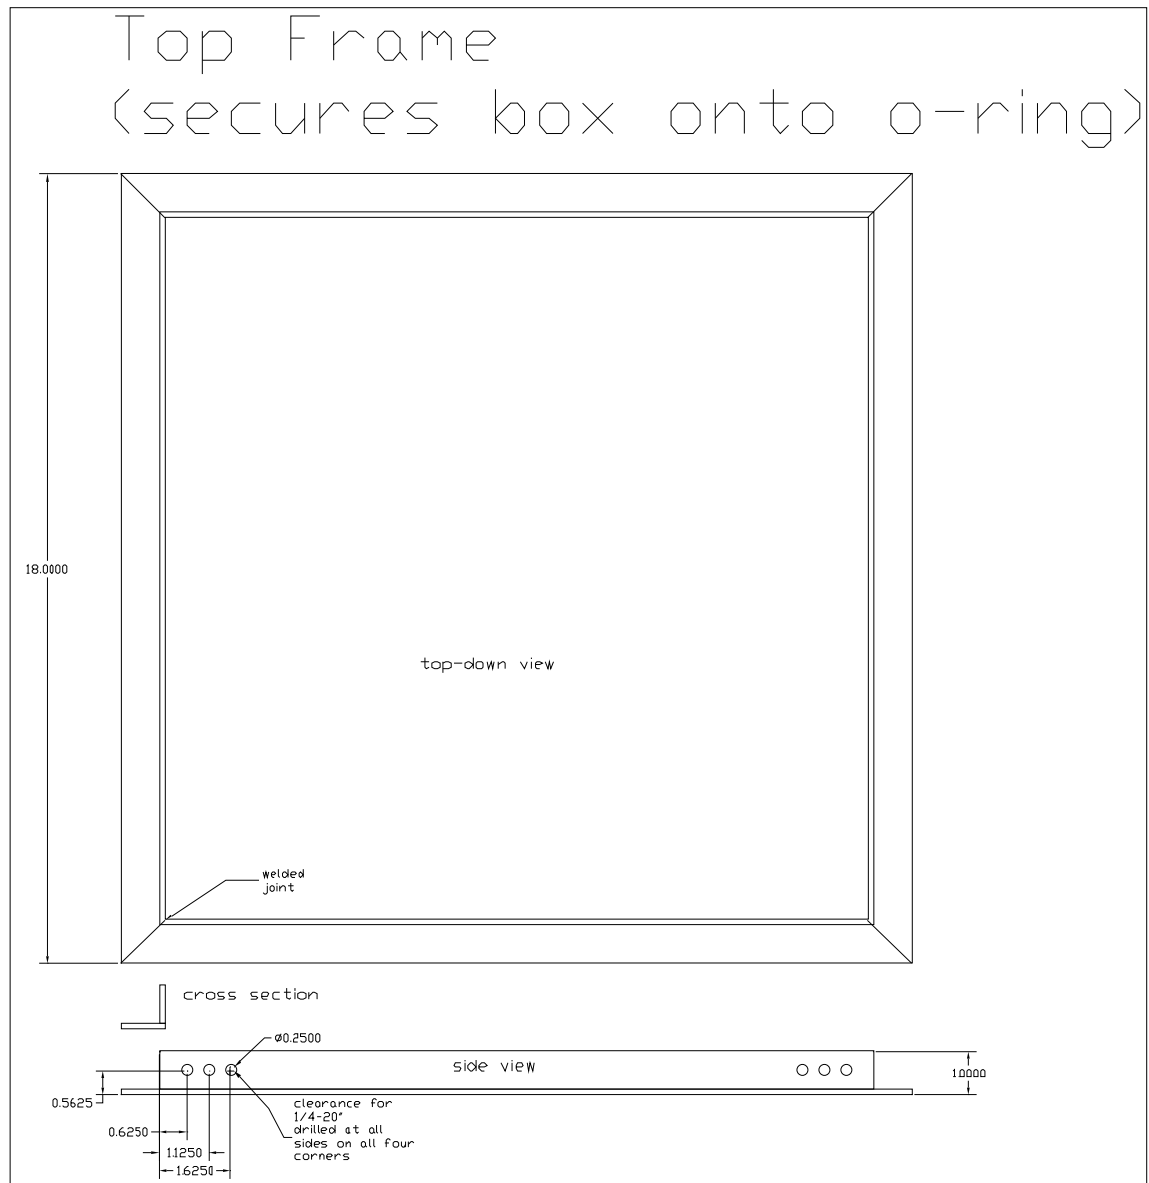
The top box frame. This is used to apply uniform pressure on the acrylic box to seal against the o-ring on the top plate of the Sprinkler. The frame is made from welded 304 stainless steel angle stock.
